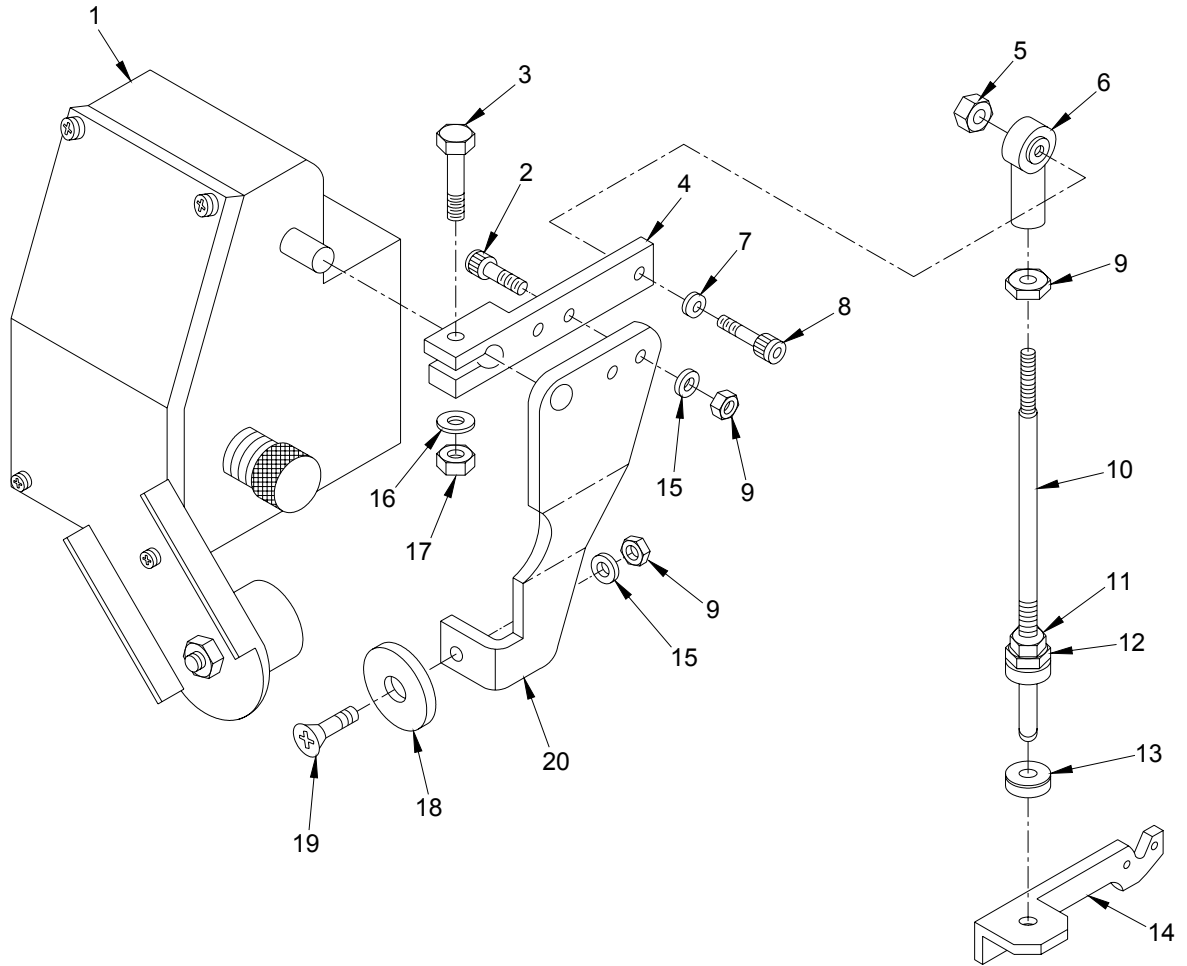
GOVERNOR ACTUATOR ASSEMBLY
